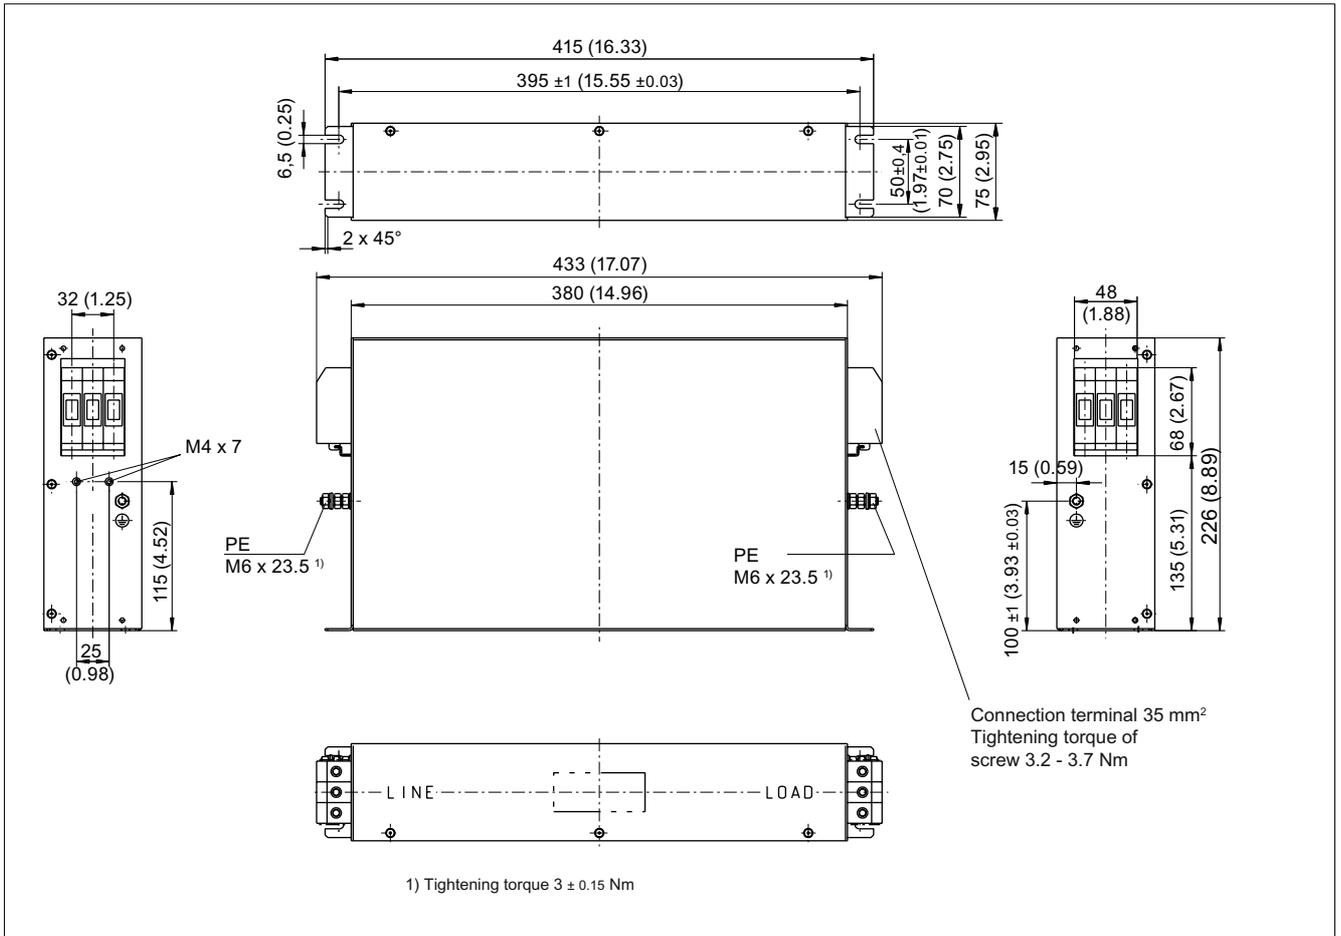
Dimension drawing of Basic Line Filter for Basic Line Modules 40 kW, order number 6SL3000-0BE23-6DA1, all dimensions in mm and (inches)
